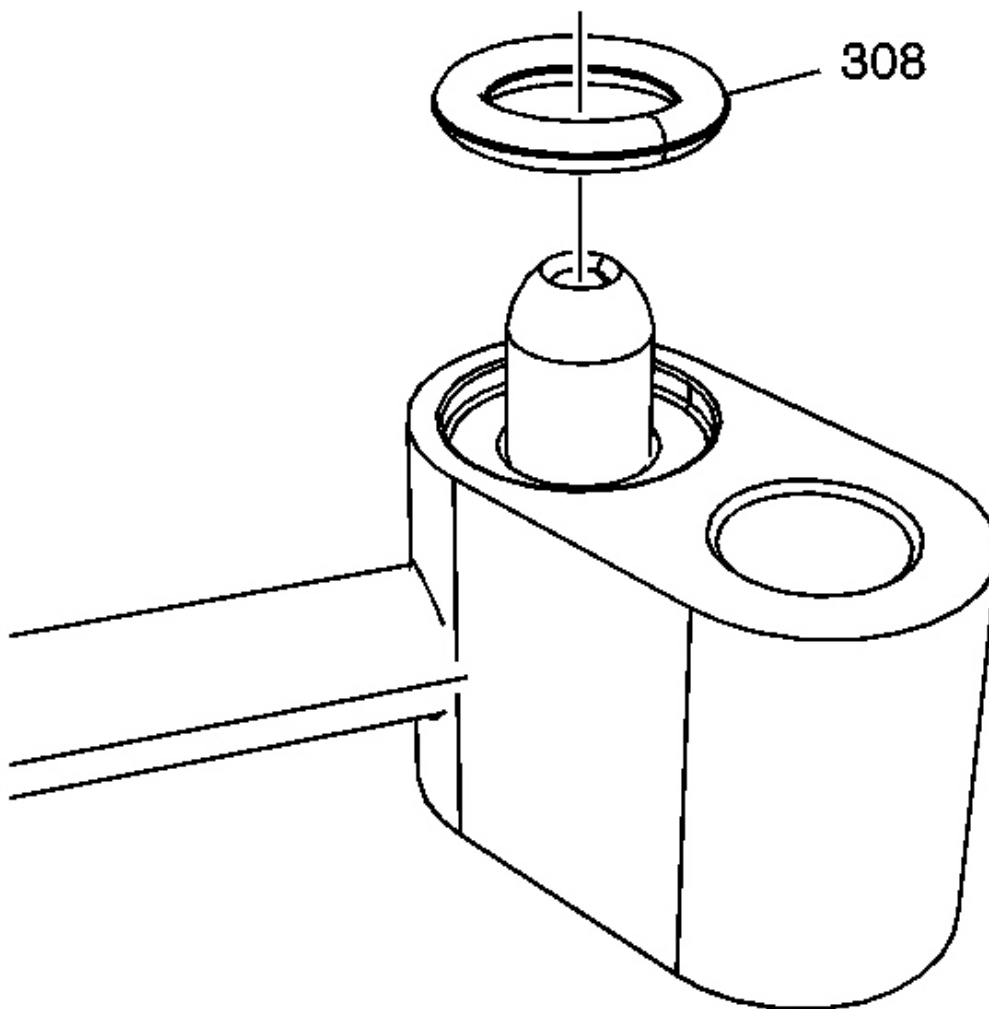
View Of Coolant Air Bleed Pipe Seal
